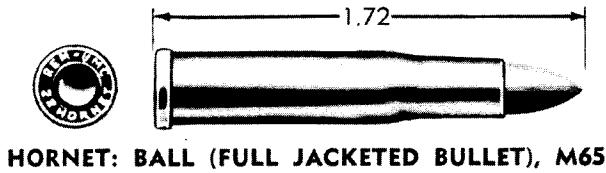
Hornet: Ball (Full Jacketed Bullet), M65.
